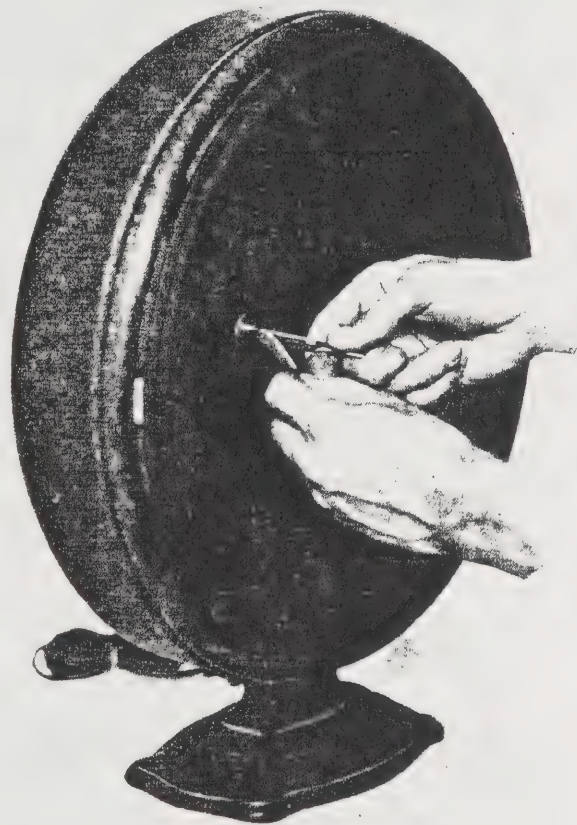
REMOVING CONE, MODELS E AND E-2.
